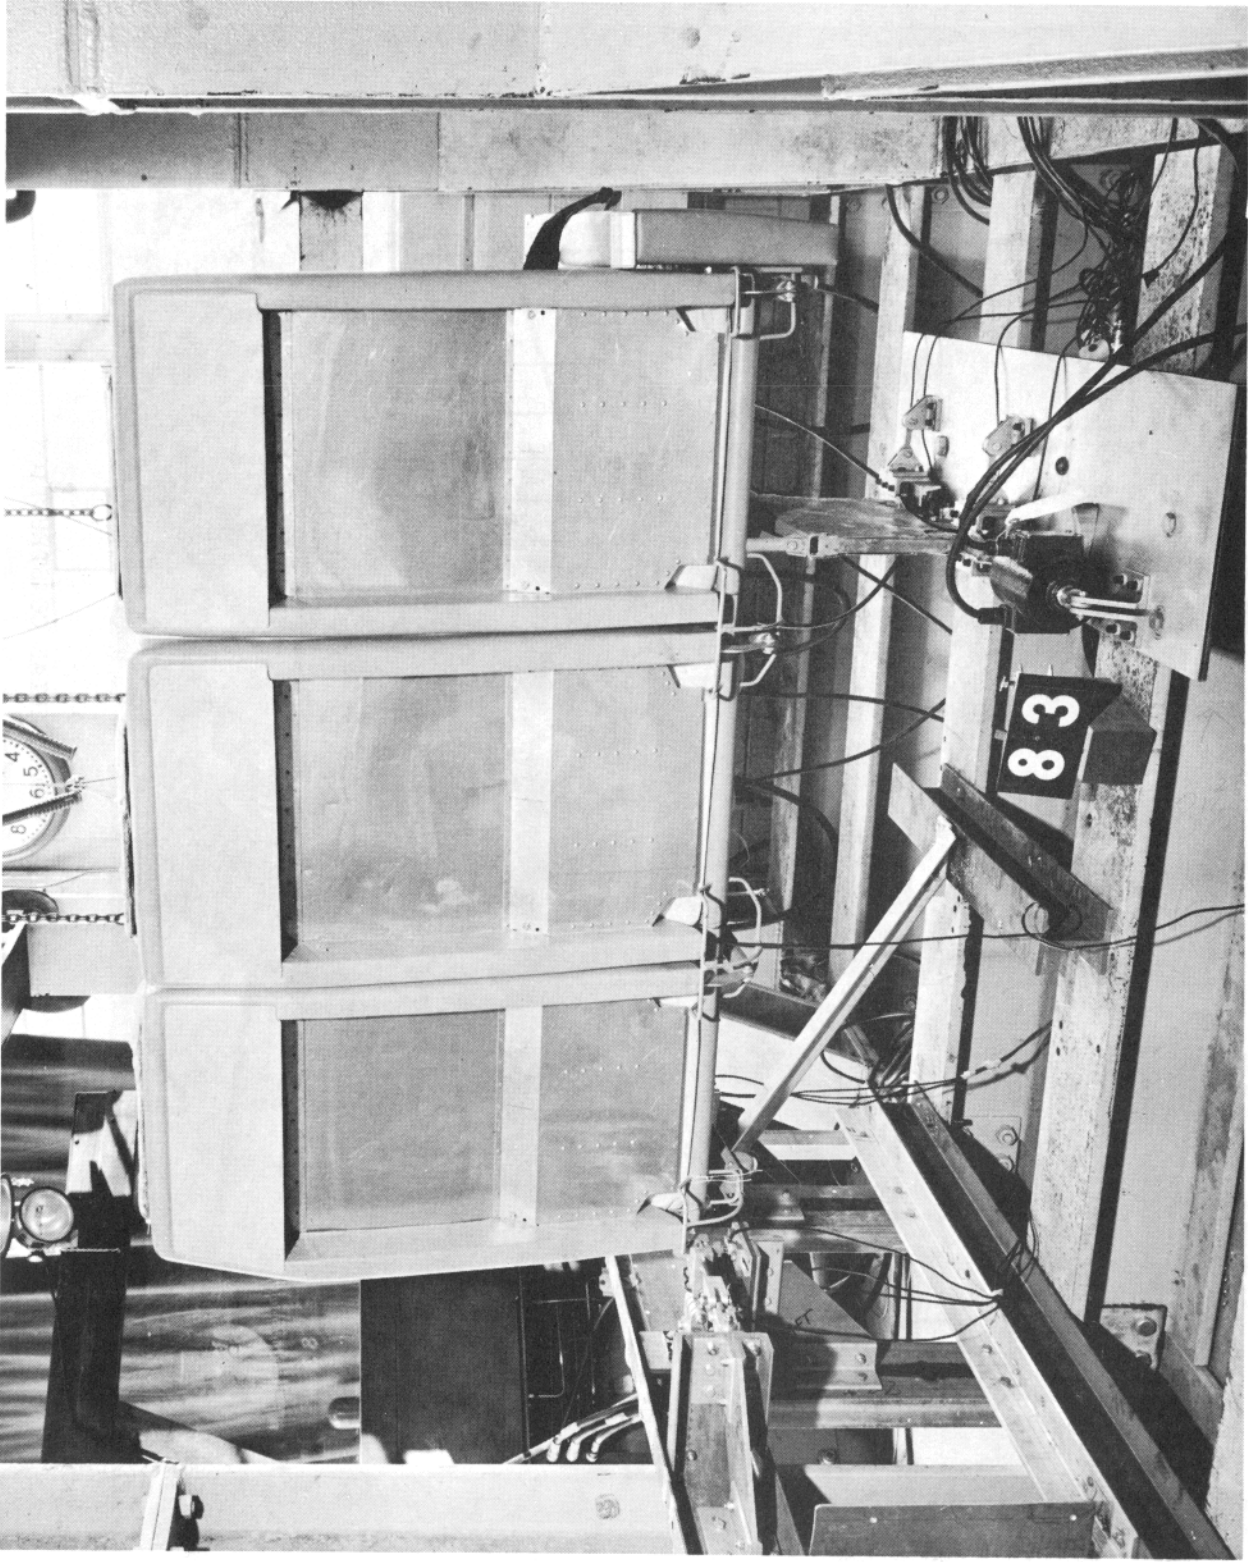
SEAT C - TUBULAR CONSTRUCTION - FLOOR/SIDEWALL MOUNTED
